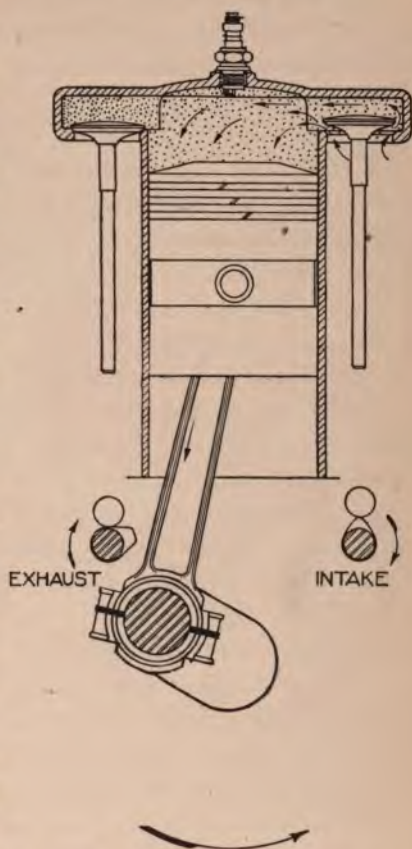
Sectional view of cylinder for a high-speed marine engine, showing valve arrangement
